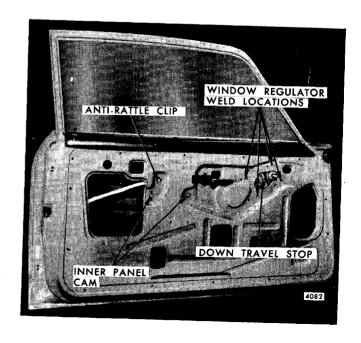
Window Removal and Adjustment - Typical Door for H and X Styles
